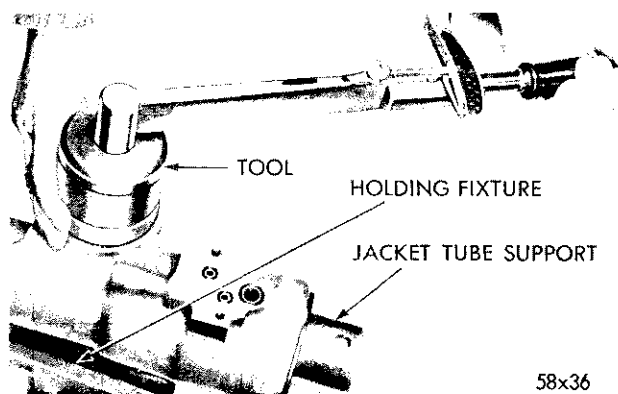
Removing or Installing Gear Shaft Cover Nut
